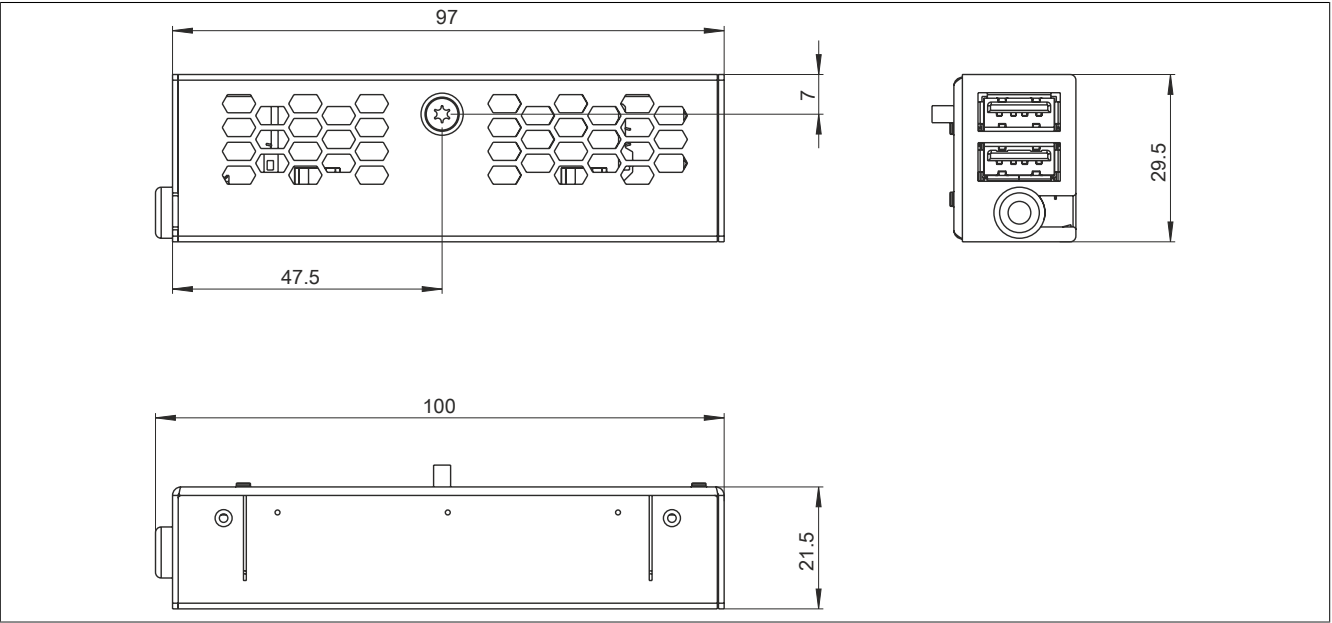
5ACCUSB4.0000-000 - Dimensions
